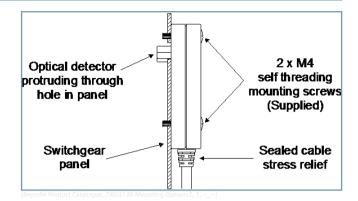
/102 RA30 shown mounted on the inside of a switchgear panel Detector oriented to 'look' out into the switchgear compartment
